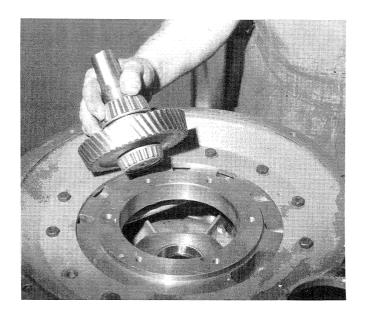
Removing the Input Shaft & Gear Assembly from Main Housing.
